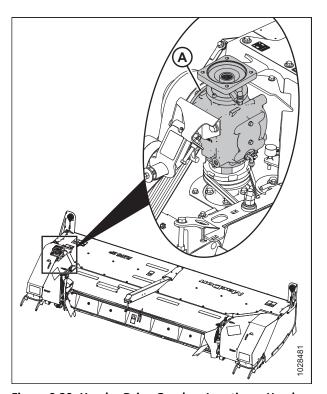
Header Drive Gearbox Location – Header with Conditioner Shown
